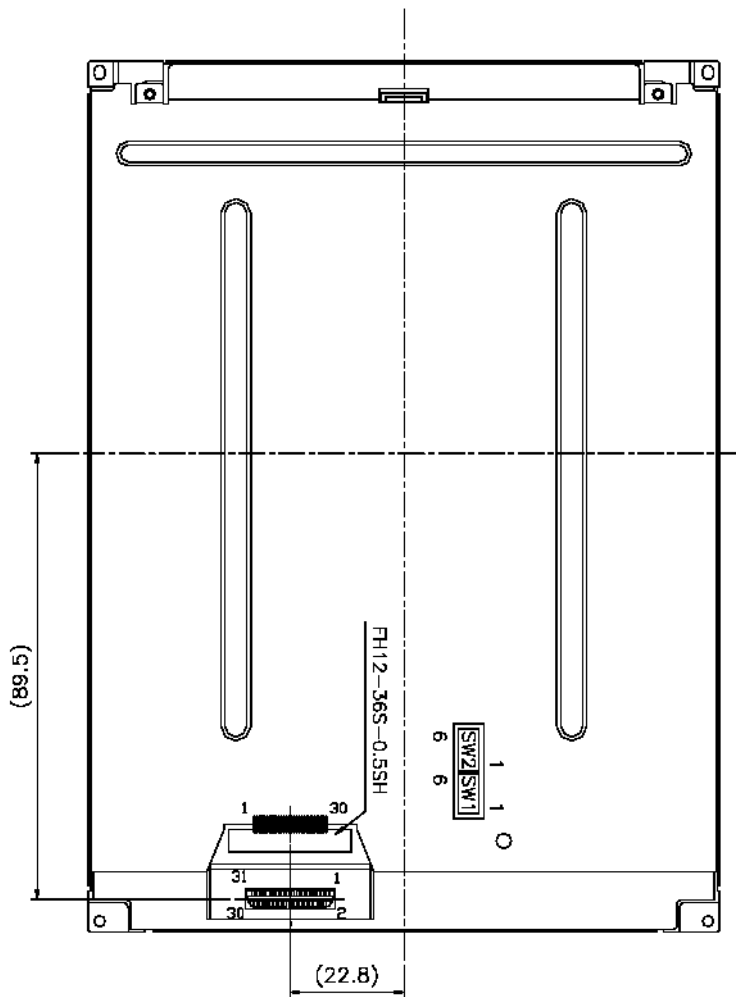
Mechanical Drawing of TFT LCD Module (part 2)
